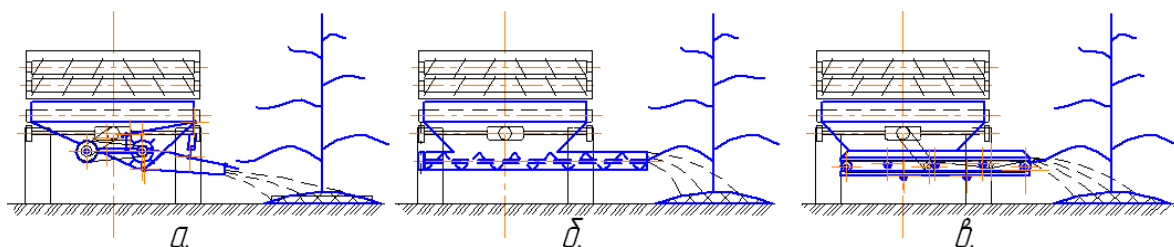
Possible working bodies of machines for making the substrate: a - rotor, - a screw in - ribbon.
